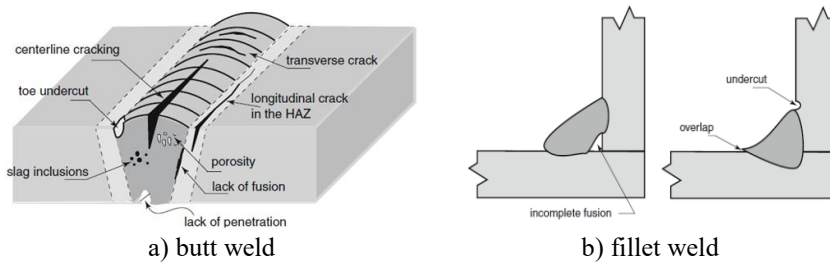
Typical weld defects in a) butt weld and b) fillet weld (Milella, 2012)
